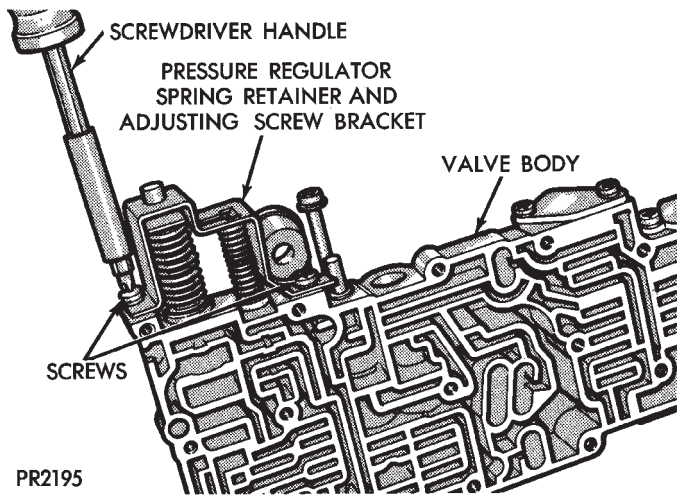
Pressure Regulator and Adjusting Screw Bracket
